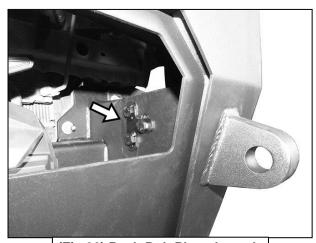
Insert Triple Bolt Plate into opening in Hiline Bumper (see Figure 32). Push Bolt Plate through side of Bumper and Winch Tray
